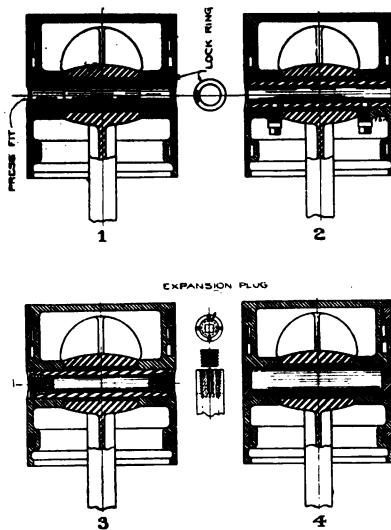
METHODS OF FASTENING PISTON PINS.
